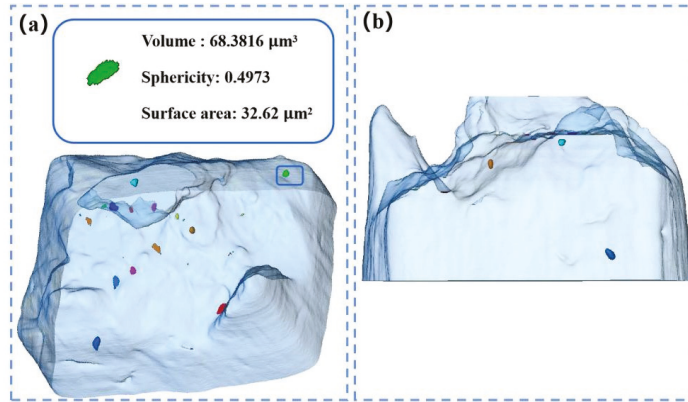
(a) Top view of fracture imaging, (b) side view of fracture imaging.
